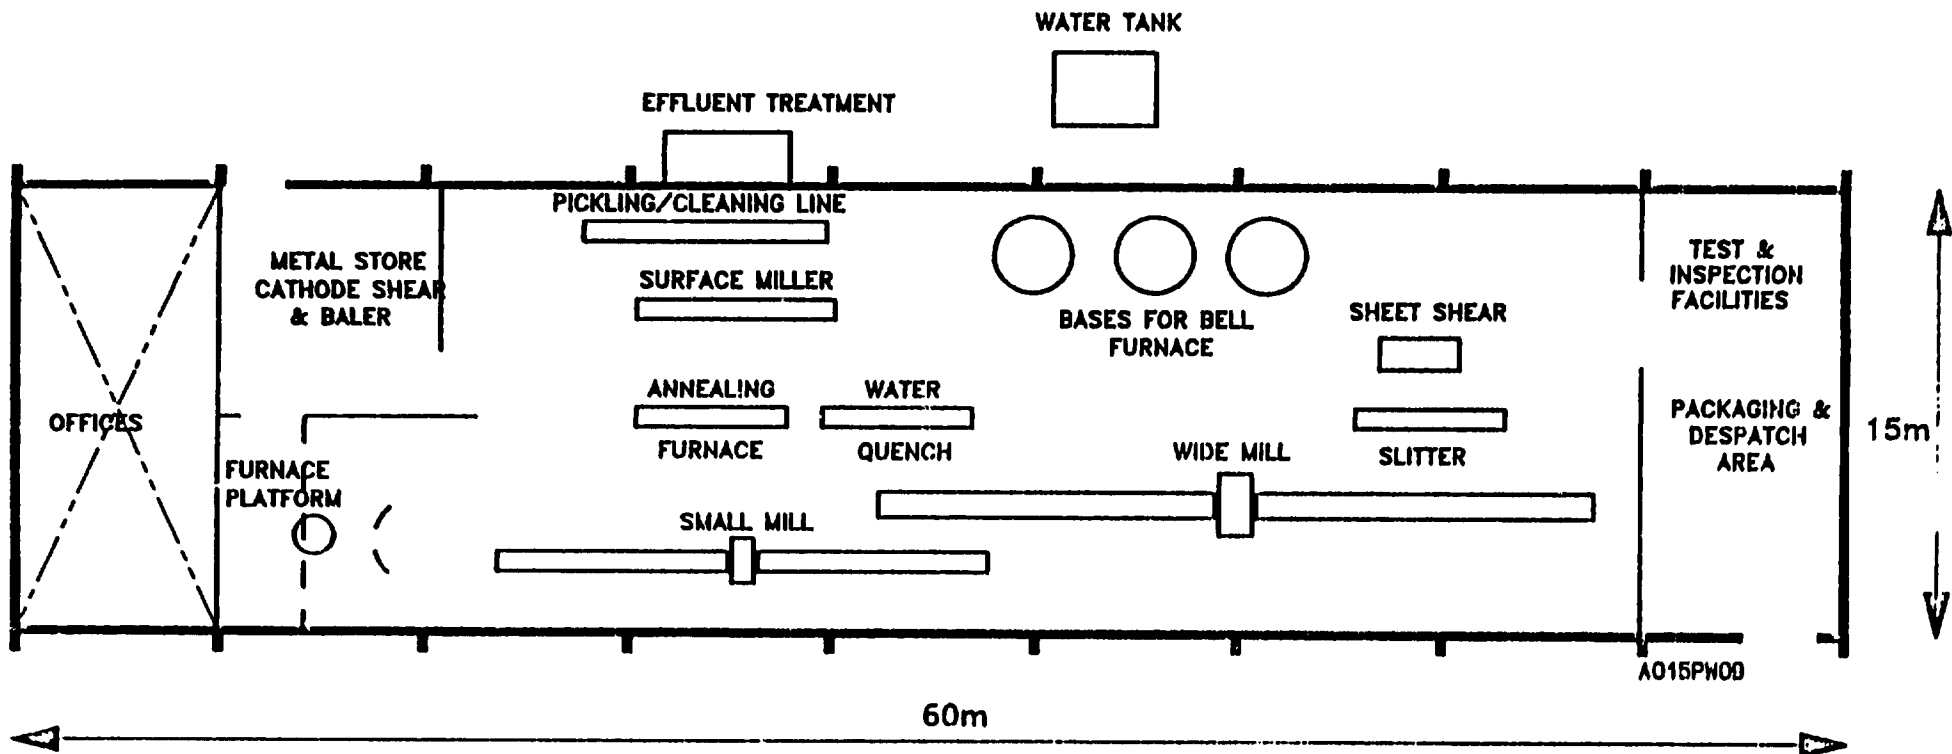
PLANT LAYOUT (SMALL MILL)
